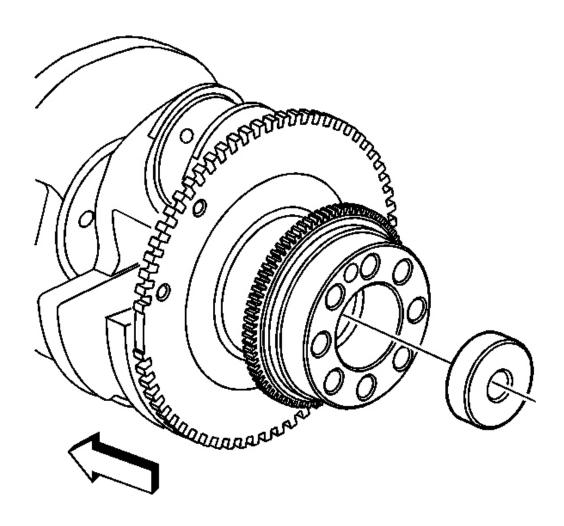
View Of Clutch Pilot Bearing Courtesy of GENERAL MOTORS CORP.
